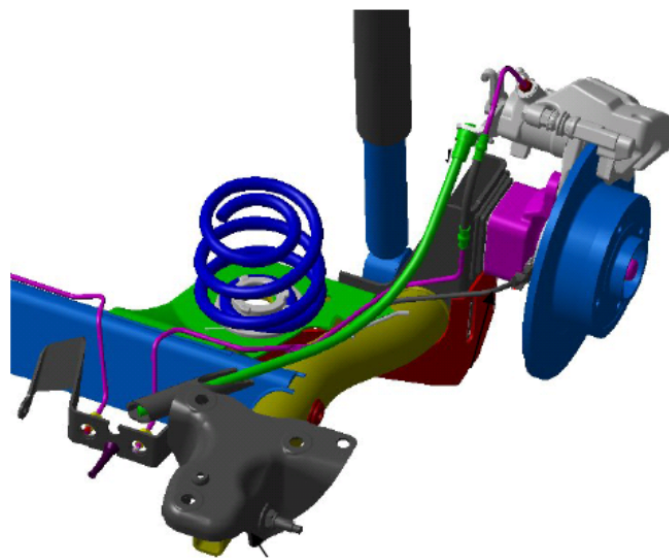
CAD drawing of the rear suspension with the spindle in violet.
